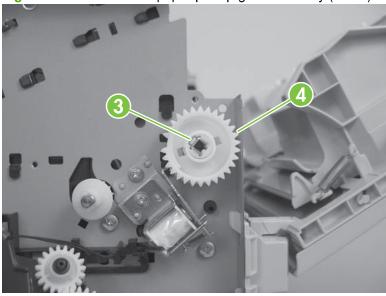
Remove the paper-pickup-gear assembly (2 of 3)
